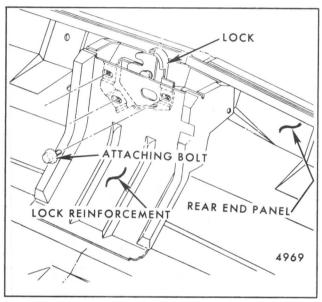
Typical Rear Compartment Lock Mounted in Rear End Panel
